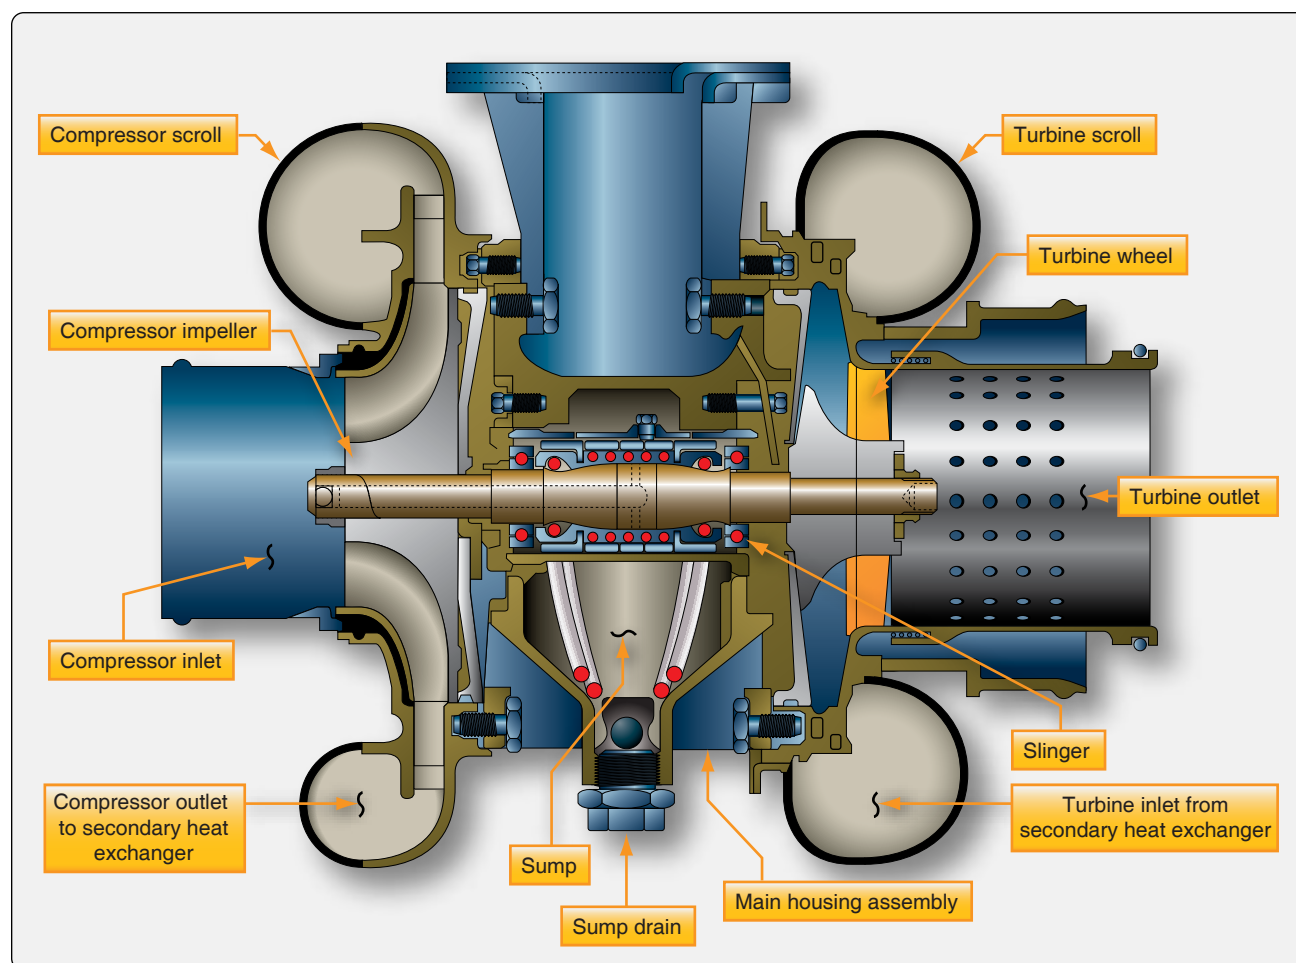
A cutaway diagram of an air cycle machine. The main housing supports the single shaft to which the compressor and turbine are attached. Oil lubricates and cools the shaft bearings.
